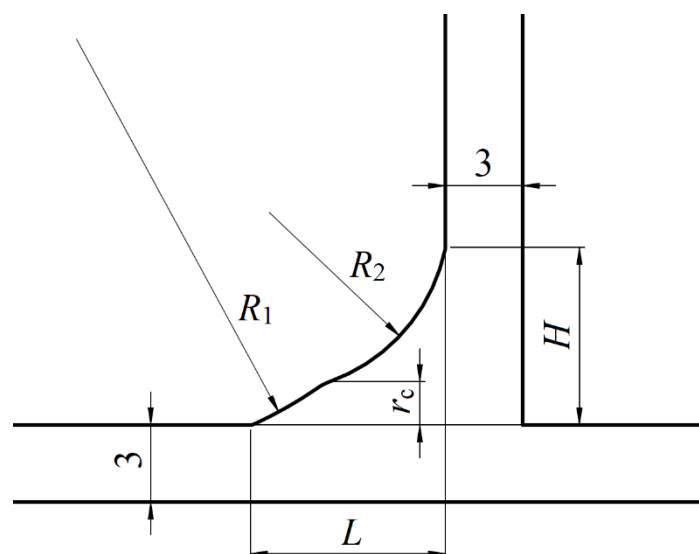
Sketch of the final T-joint weld geometry in the 2D detailed model
